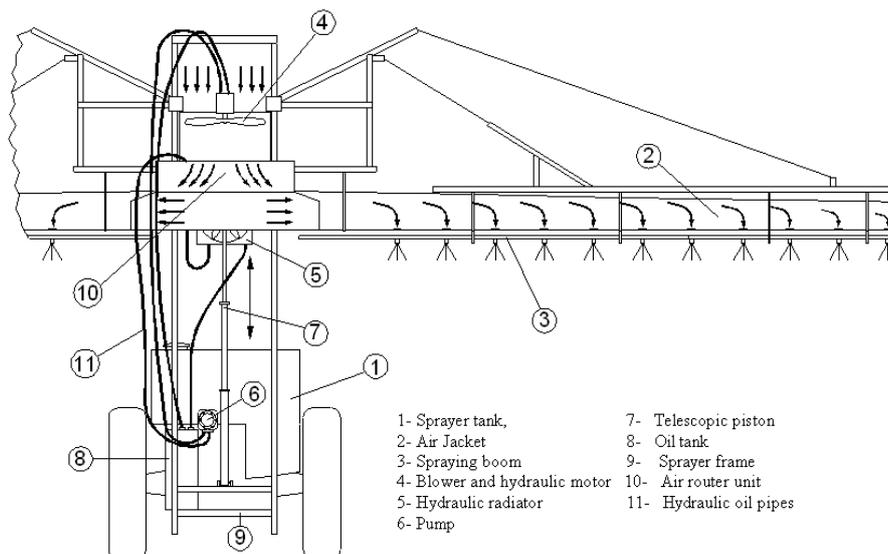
Schematic view of the prototype sprayer manufactured for maize plant spraying
